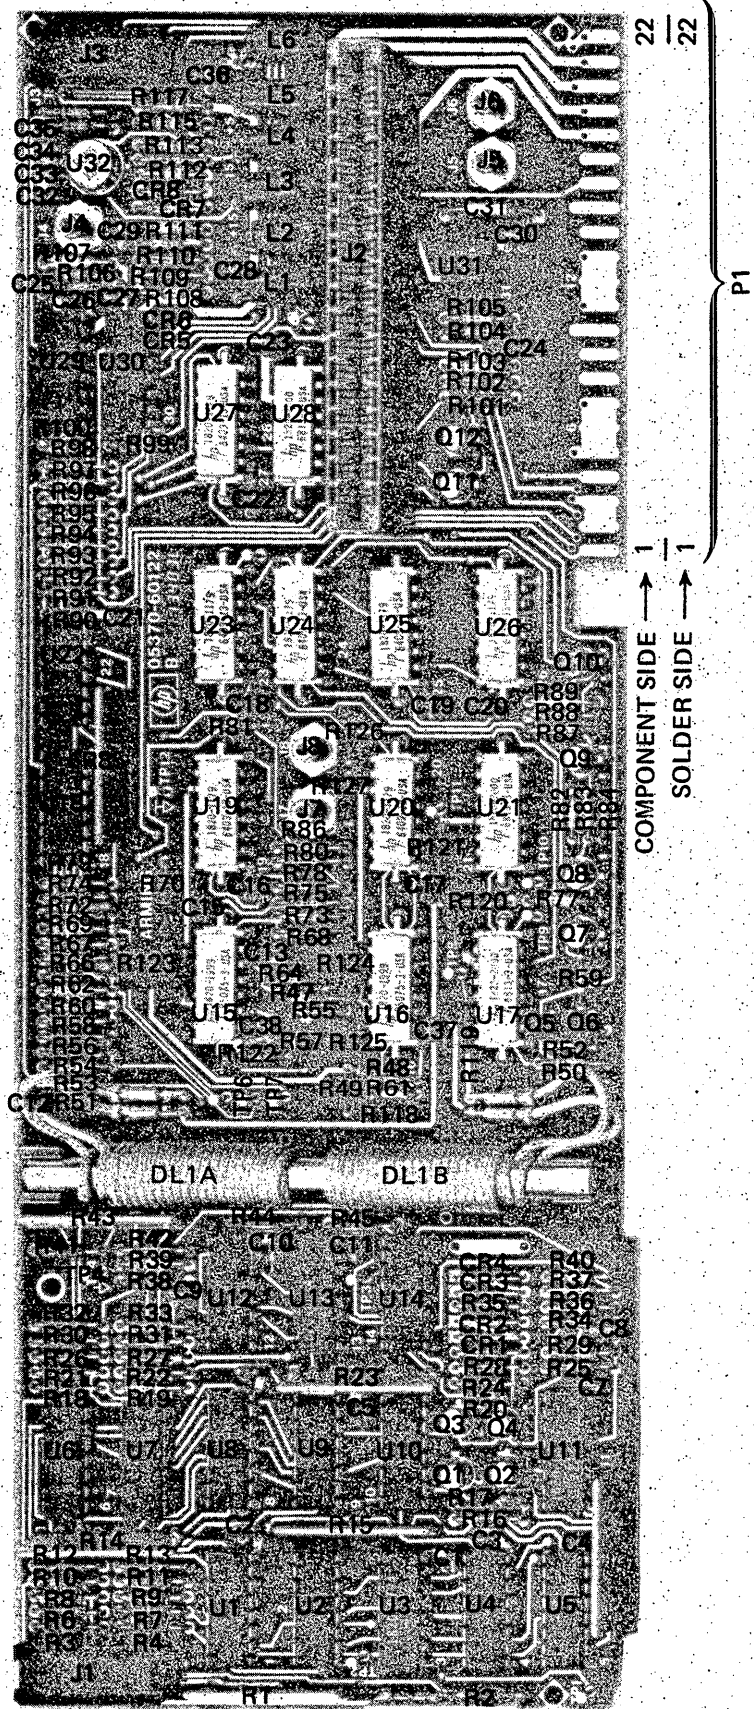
A22 Arming Assembly (05370-60122) Component Locator
